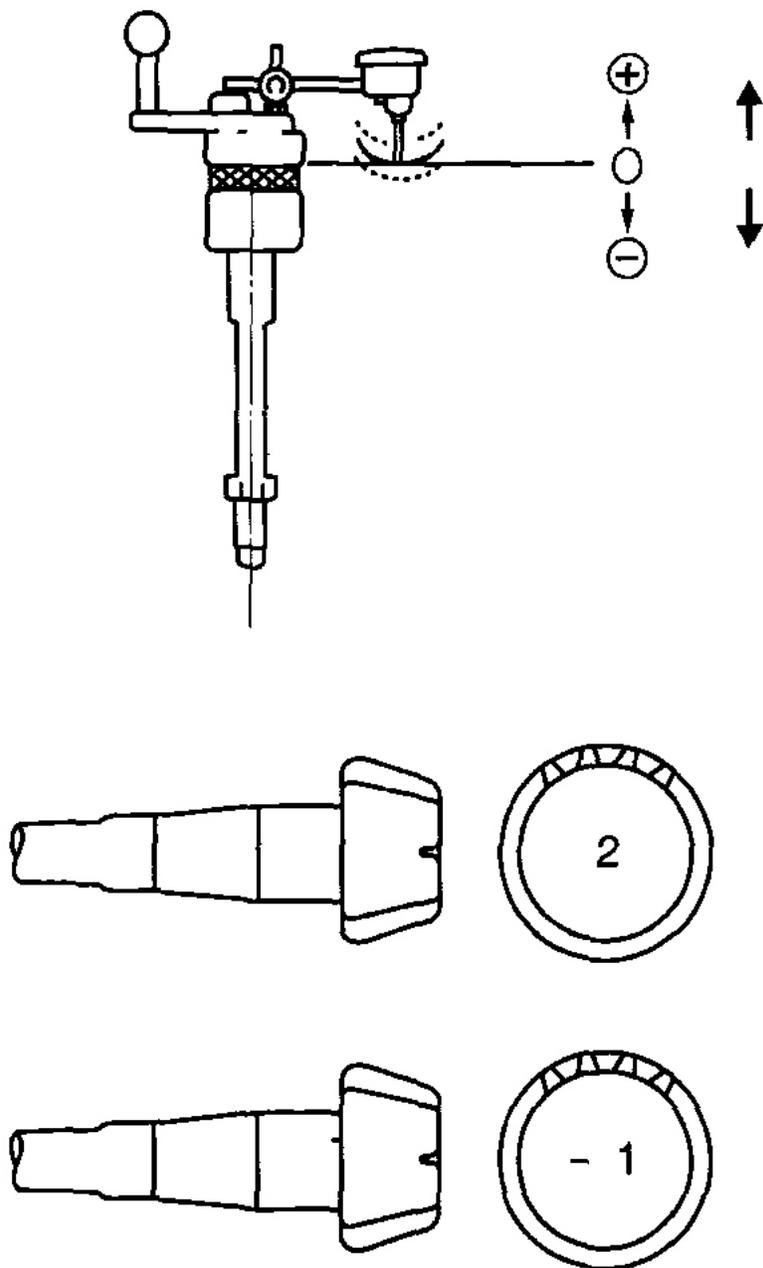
Placing SST On Surface Plate & Setting Dial Gauge To Zero
